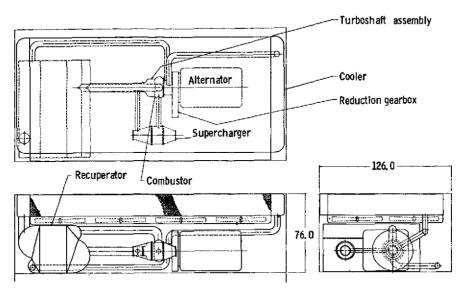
Group III 7500-horsepower, single-shaft TACV component layout,
